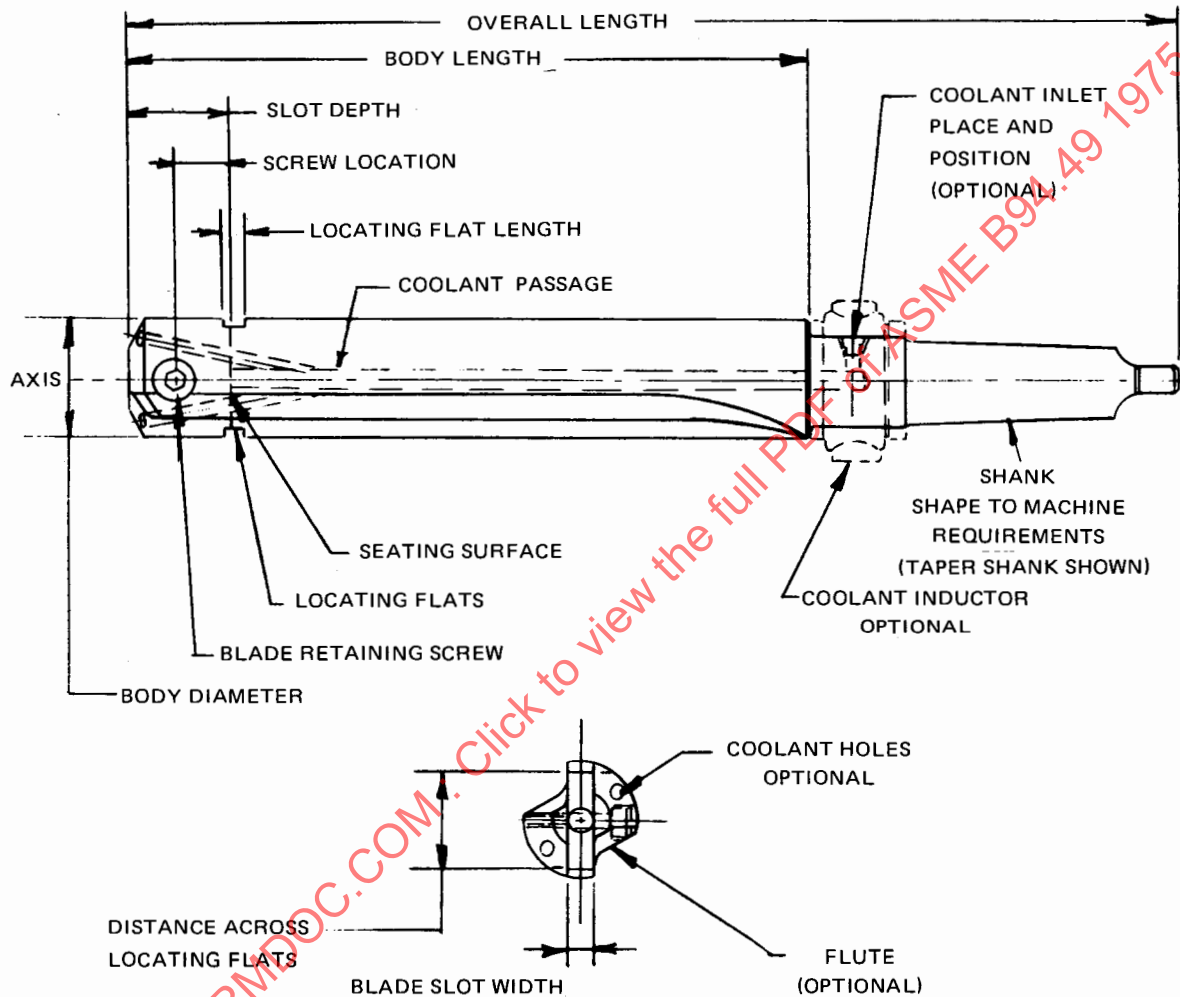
SPADE DRILL HOLDER NOMENCLATURE
